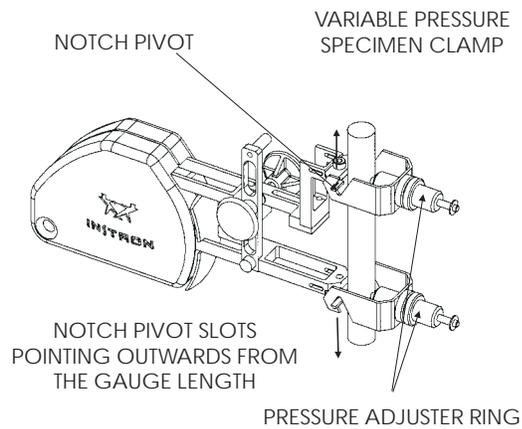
Specimen attachment using the optional Specimen Clamps and Pivot Knife Edges
